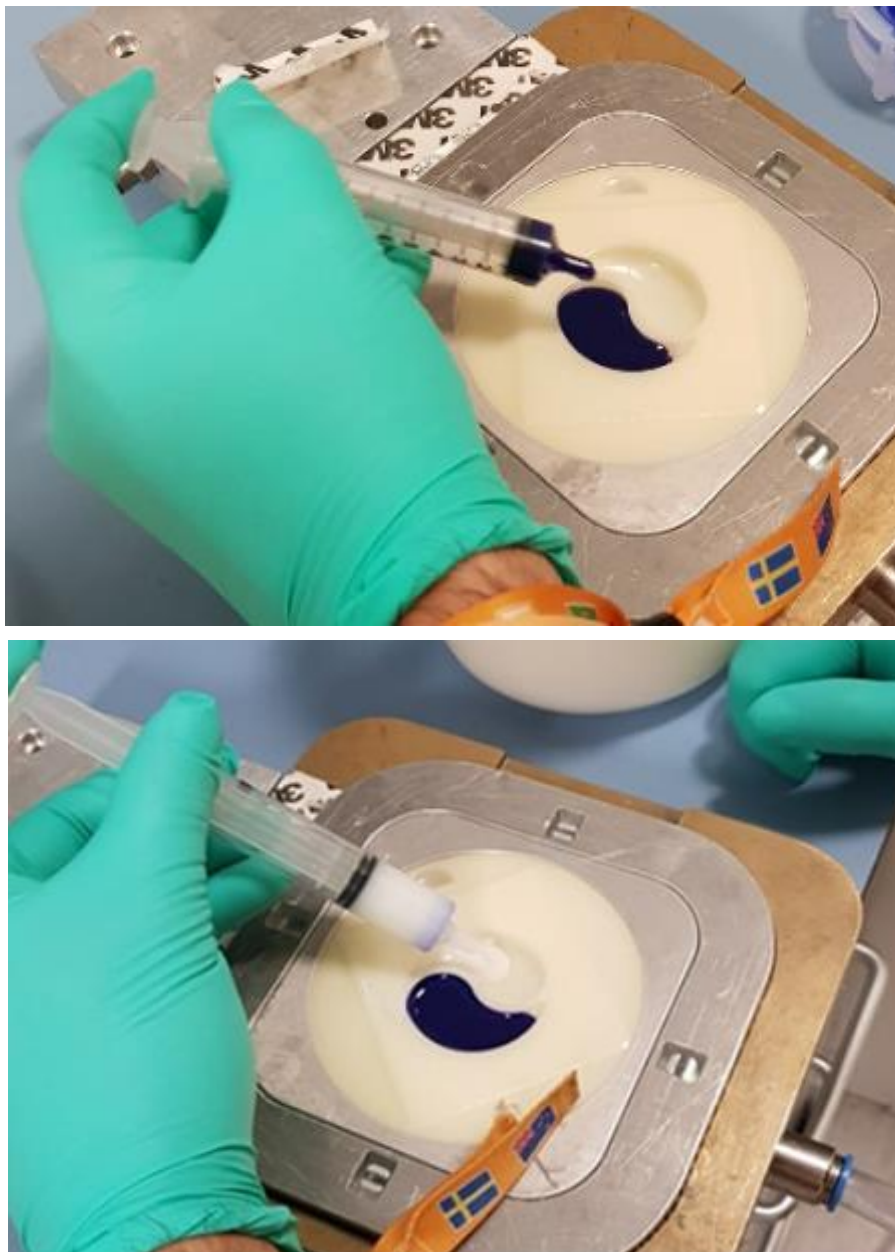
Thermo/vacuum machine used for producing a single pouch
